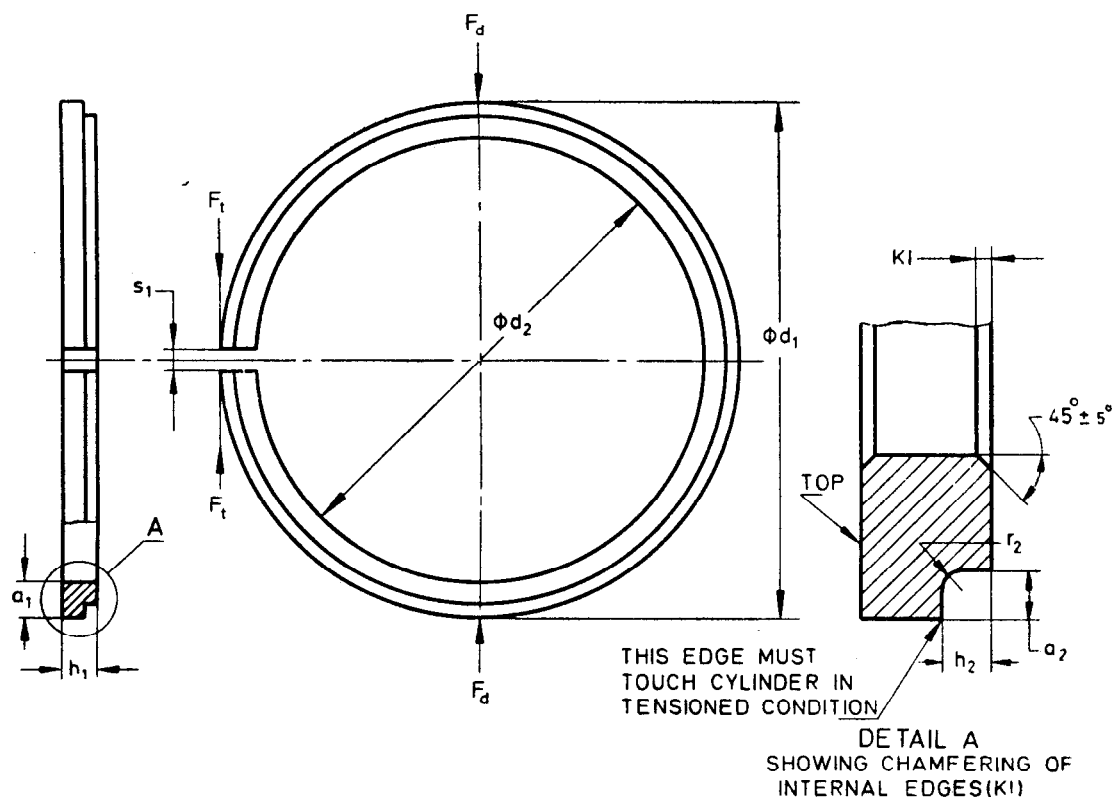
STEPPED OIL SCRAPER RING (Z-RING)
